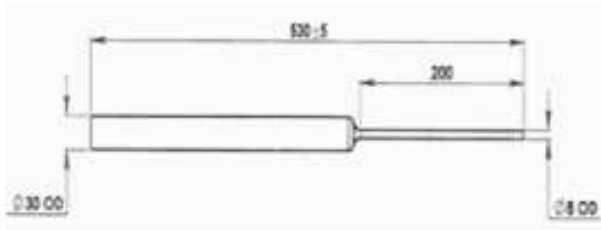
Drawing of the QT designed to hold a 55 mm \times 20 mm target.
